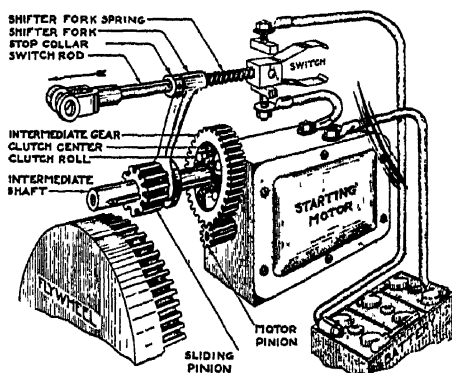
Sliding pinion type of motor drive. (Early Gray & Davis)
